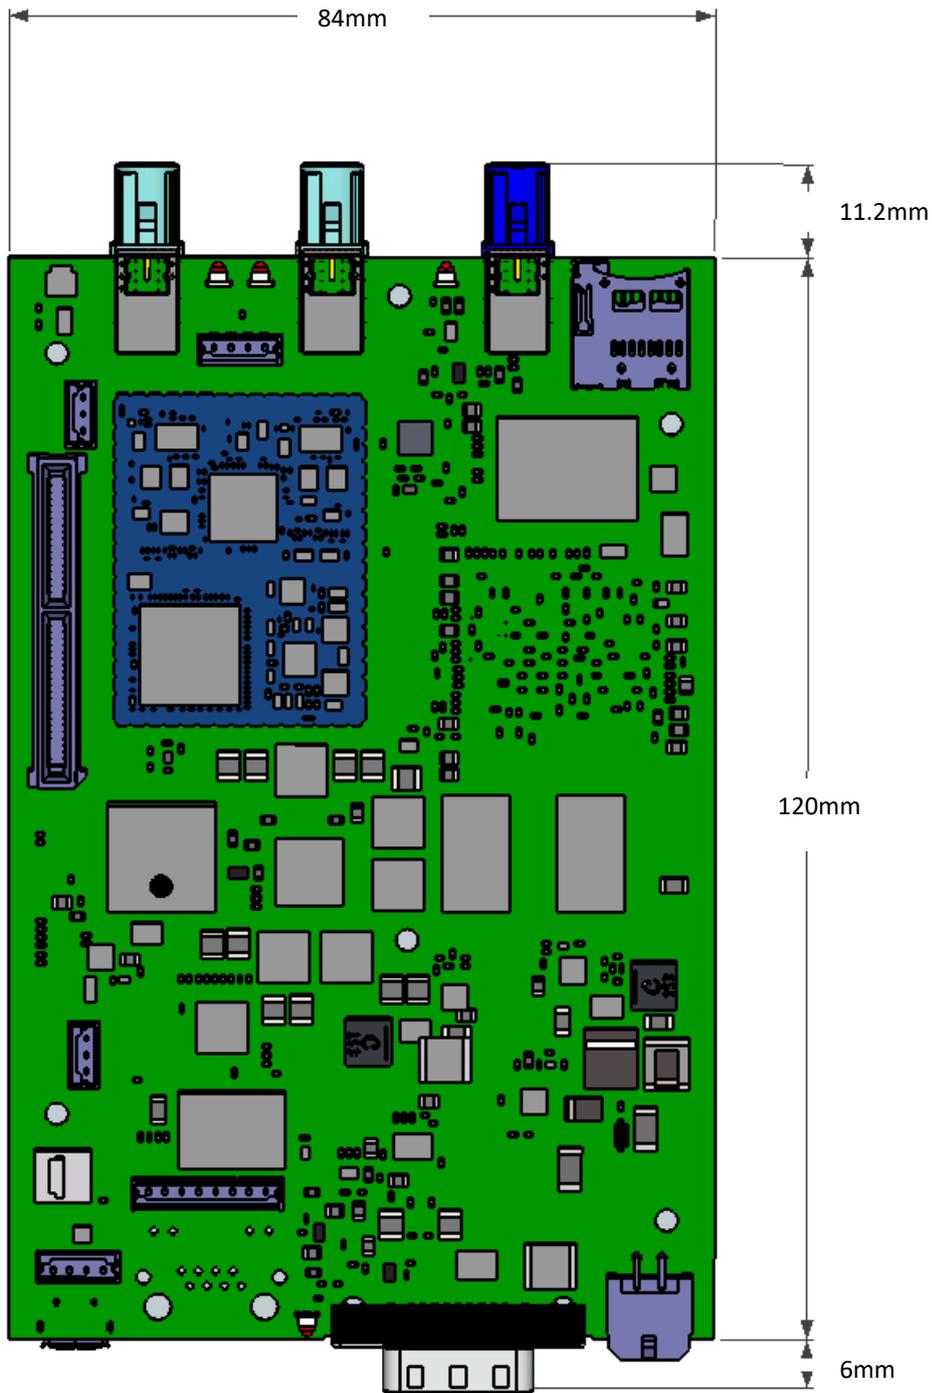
PCB DIMENSIONS WITH MOUNTING HOLE LOCATIONS
